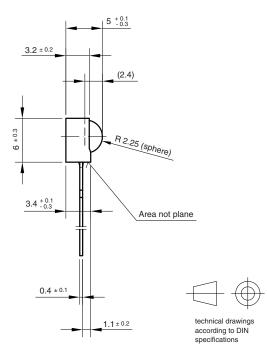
Issue: 2; 19.06.01 95 11475
